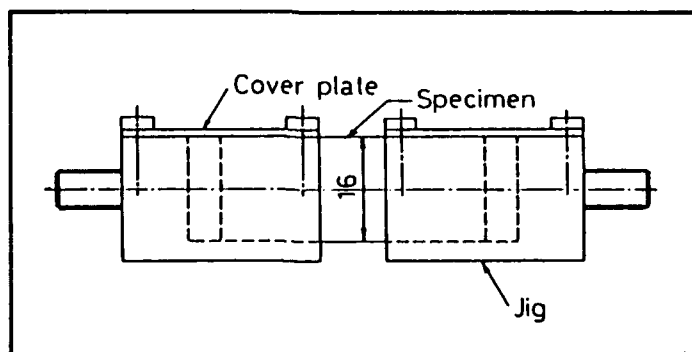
Dimensions of Specimen and an Assembly Drawing (Dimensions in mm).
